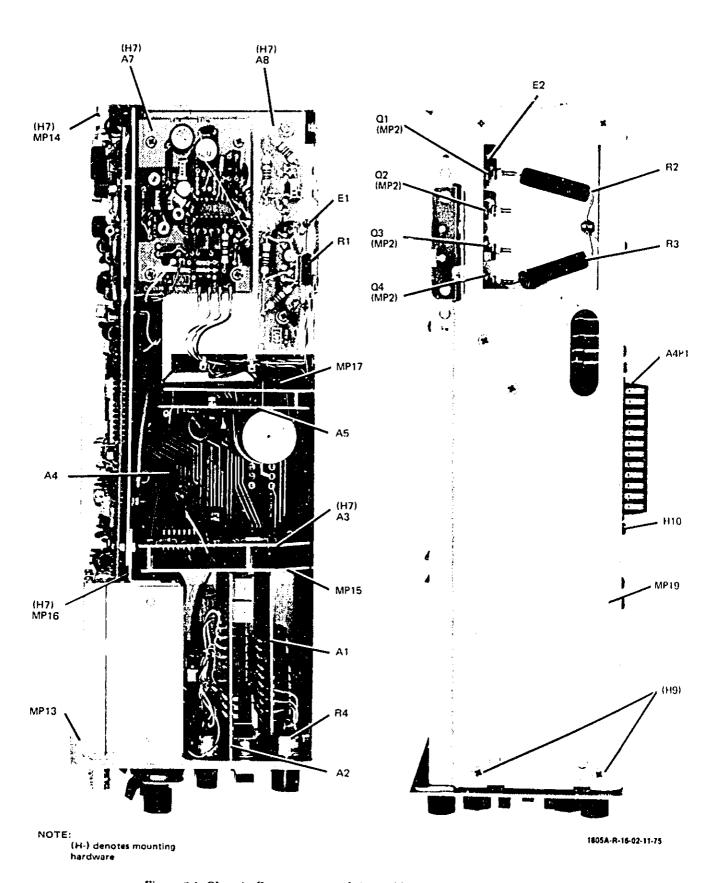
Chassis Component and Assembly Locations (Sheet 2 of 2)
